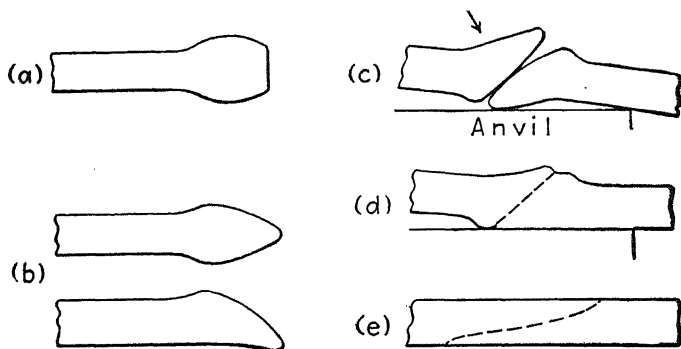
Steps in welding. *a*, The upset end; *b*, face and side of scarf; *c*, on anvil ready for first welding blow; *d*, ready for cleaning and finishing; *e*, finished weld.
